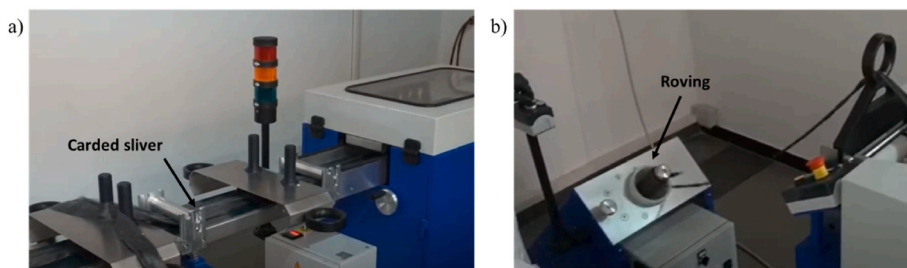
a) Doubling of the drawing phase; b) Flyer machine for the production of the roving.
